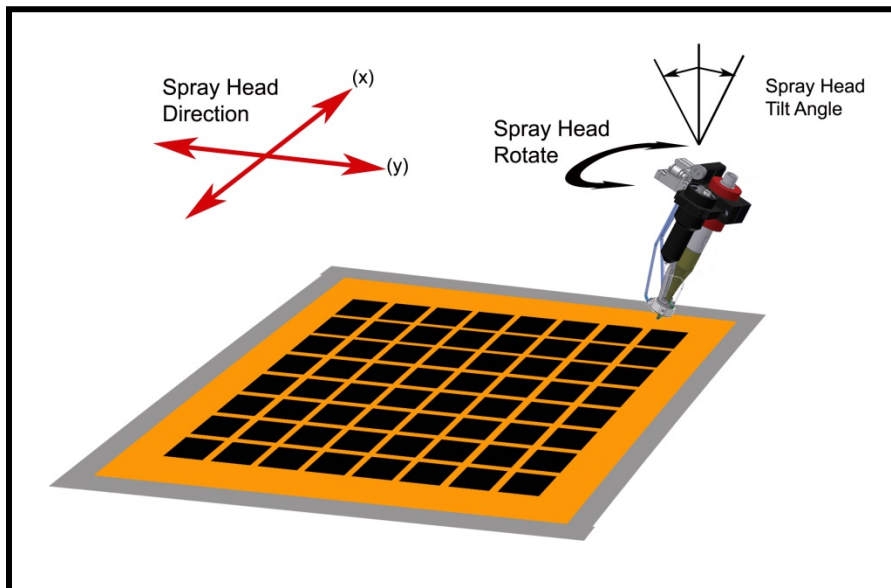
Ultrasonic Spray Head with Tilt & Rotate
